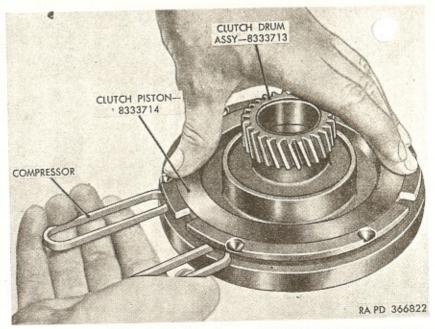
Installing clutch piston large oil seal ring using compressor— A8708710.
